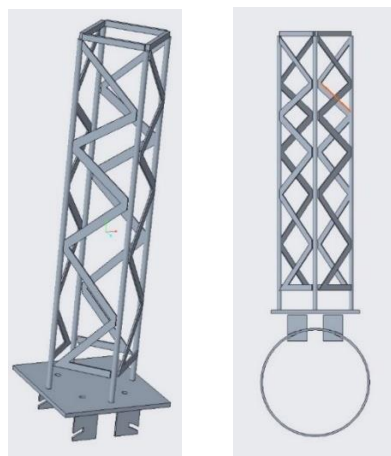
(a, b) - Rigid arm made up of steel threaded rods, welded in a truss system
